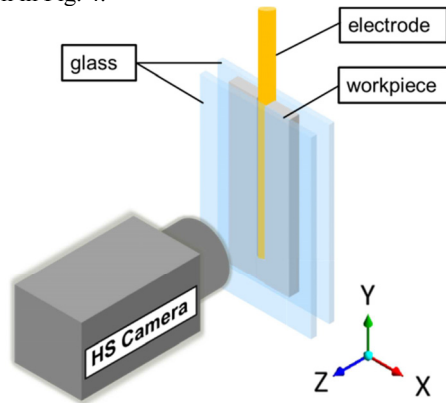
High speed camera setup, the workpiece is mounted between two pieces of glass
